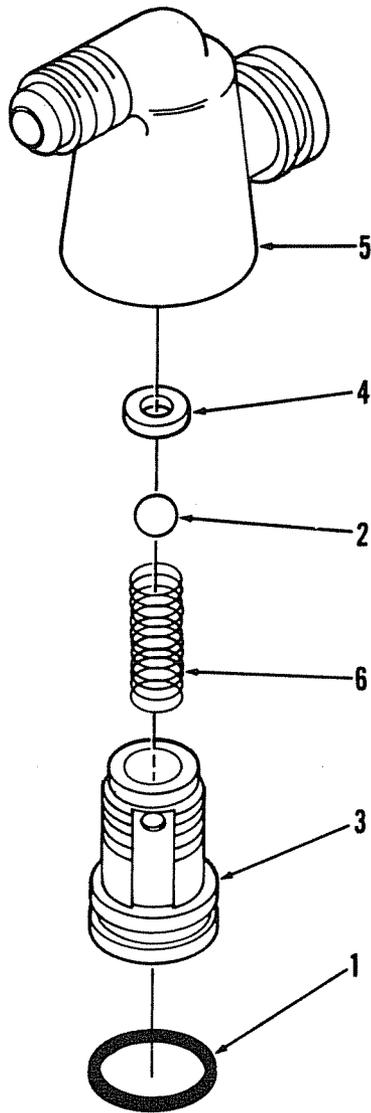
GAS CHECK VALVE ASSEMBLY, PLASTIC
